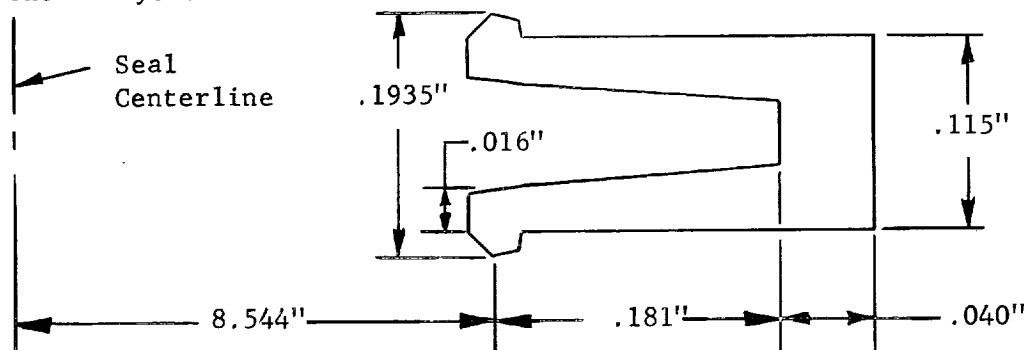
Nominal Dimensions of Seal Cross-section
